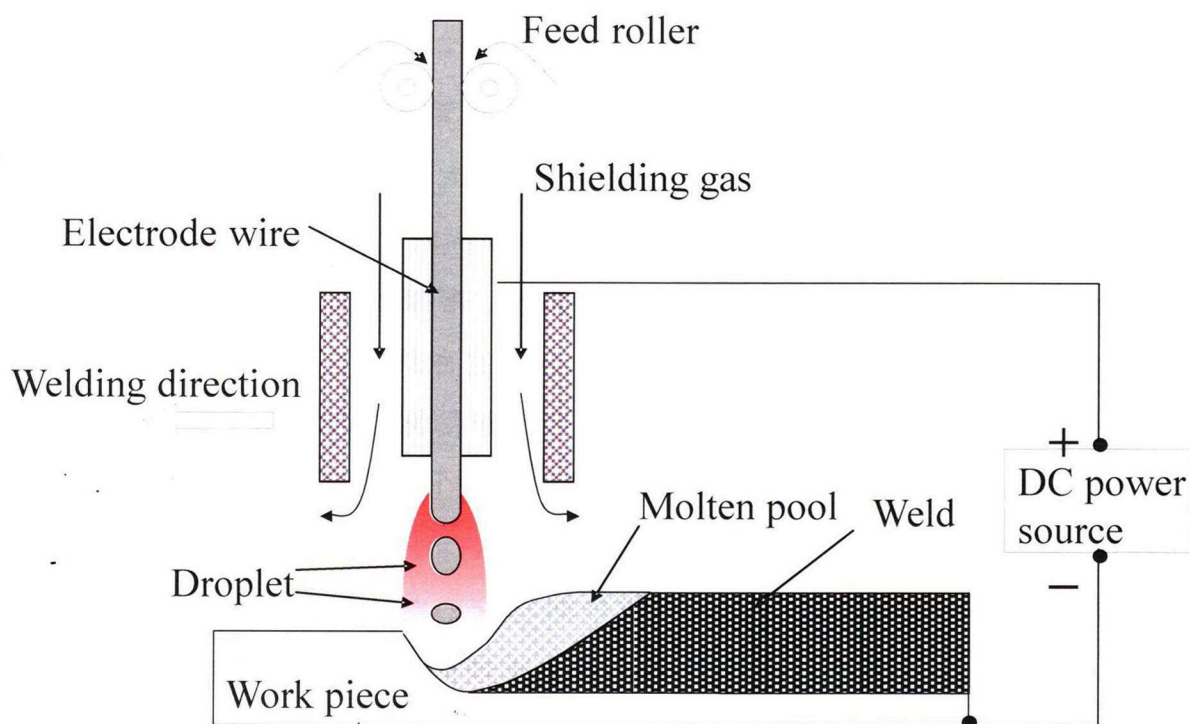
Diagram of gas metal arc (GMA) welding.
